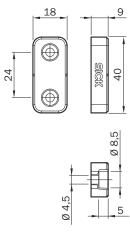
Dimensional drawing of "Flat" STR1 actuator
